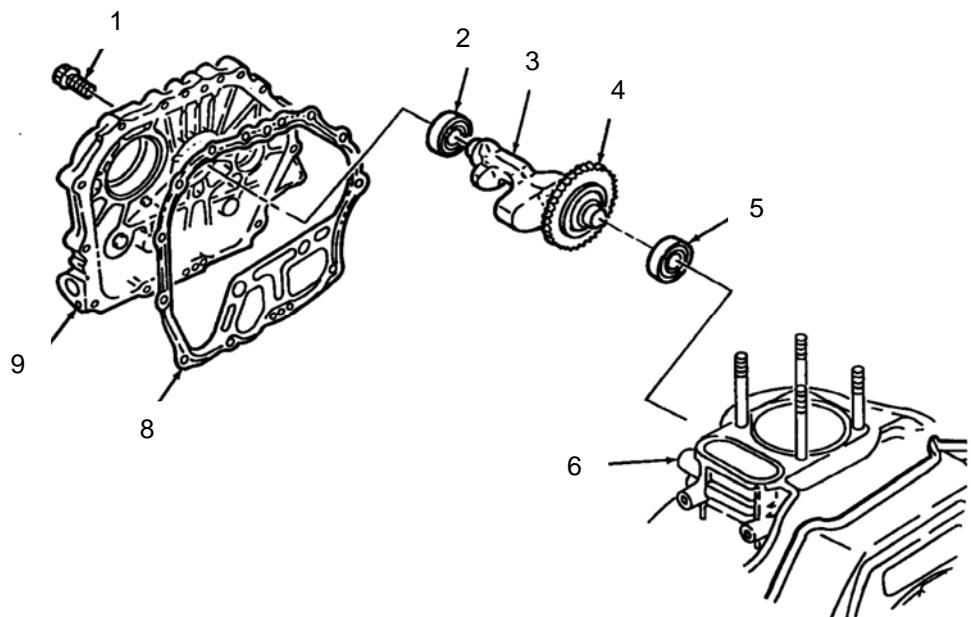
Install Balancer Shaft (Sheet 1 of 2).
